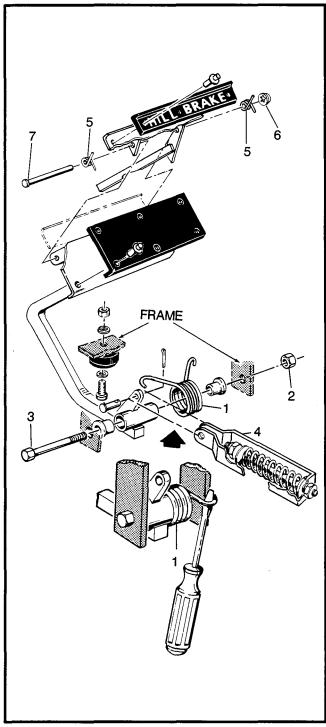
BRAKE PEDAL SPRING RE-MOVAL
